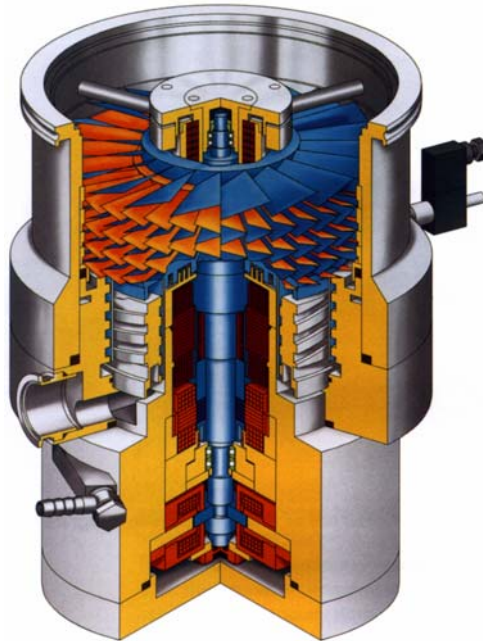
Cross-section of a turbopump with magnetic bearing and Holweck stage
